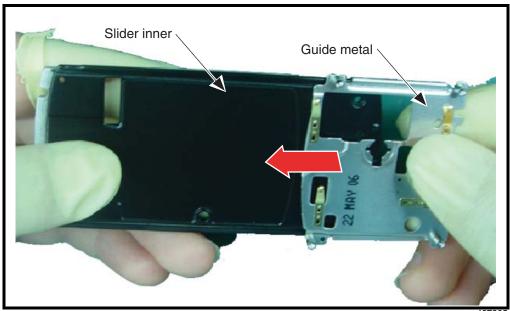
Guide Metal Assembly to Slide Inner Assembly
